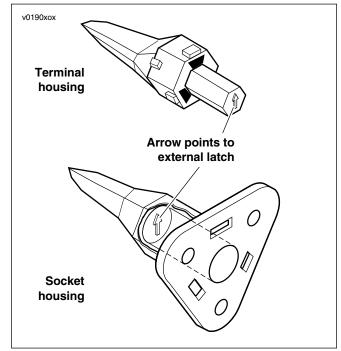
Depress Terminal Latches/Back Out Terminals
